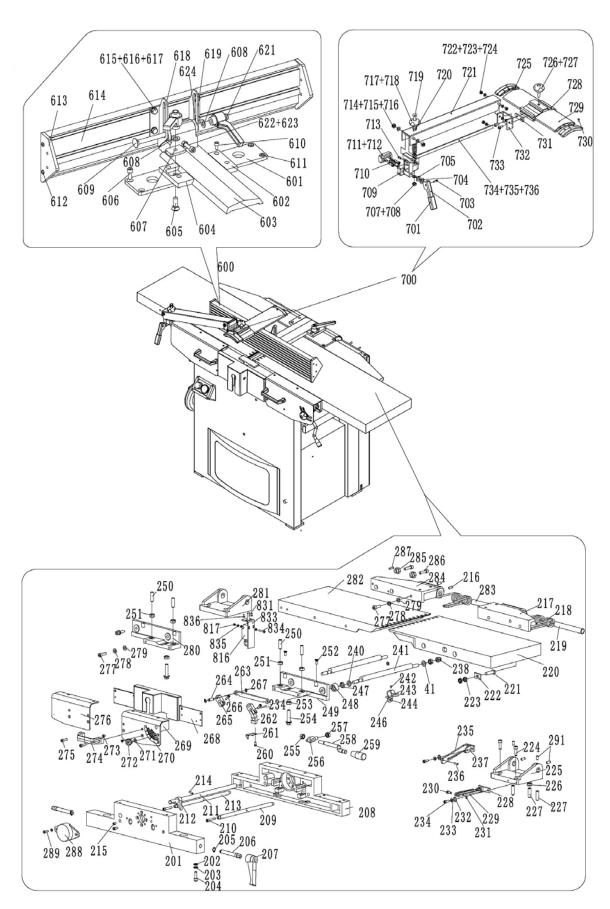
Spare parts drawing 2 ADH 31-4 C and 41-4 C
